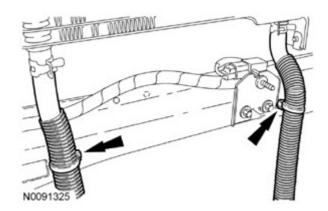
Locating Transmission Fluid Cooler Hose Retainers Courtesy of FORD MOTOR CO.
